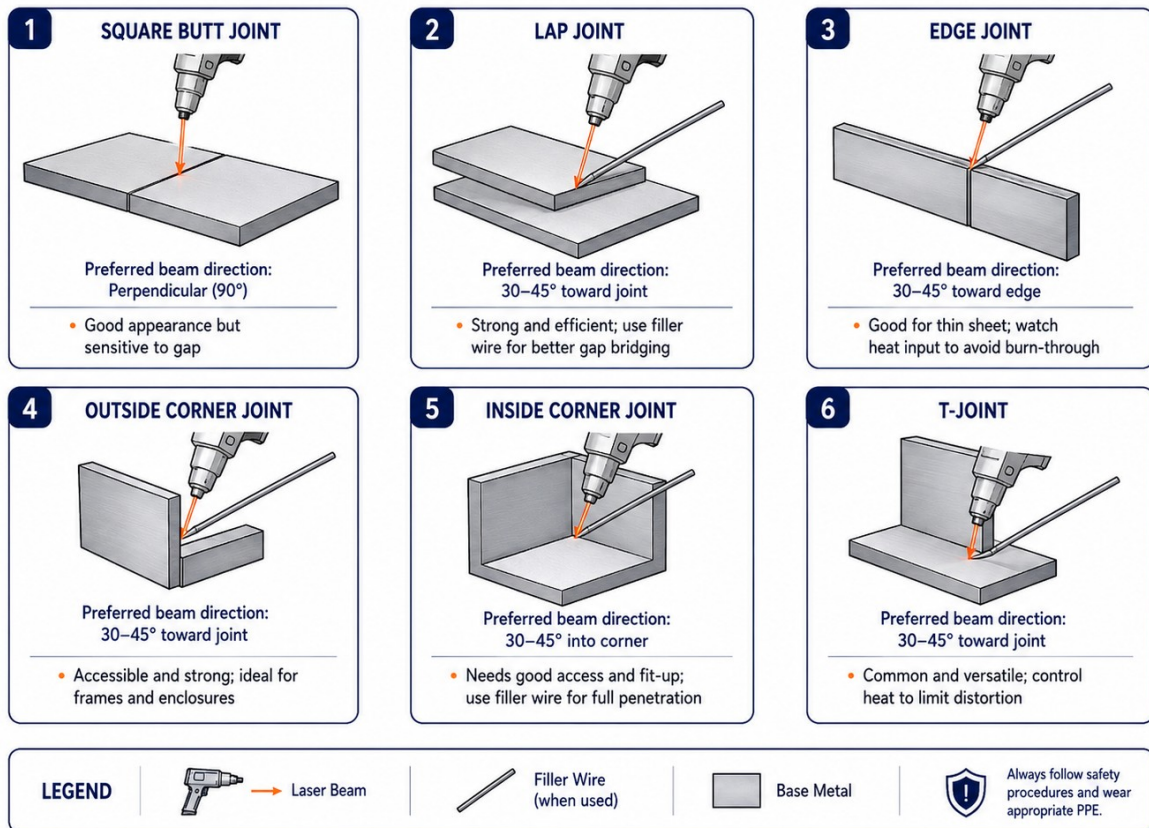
Common joint types used in handheld laser welding. Final torch position and parameters must follow the qualified procedure and machine guidance.
